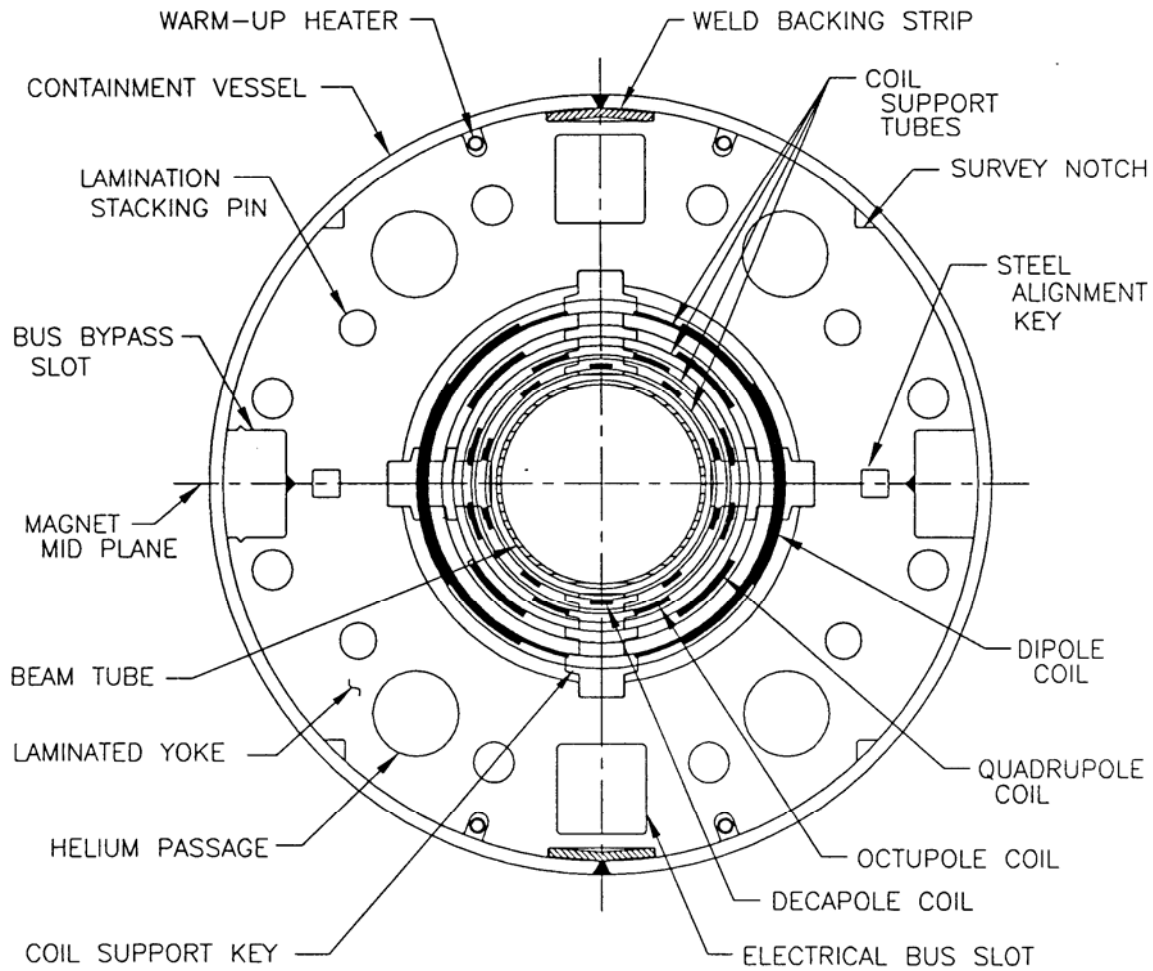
Arc corrector cross-section (beam tube i.d. = 69 mm).
